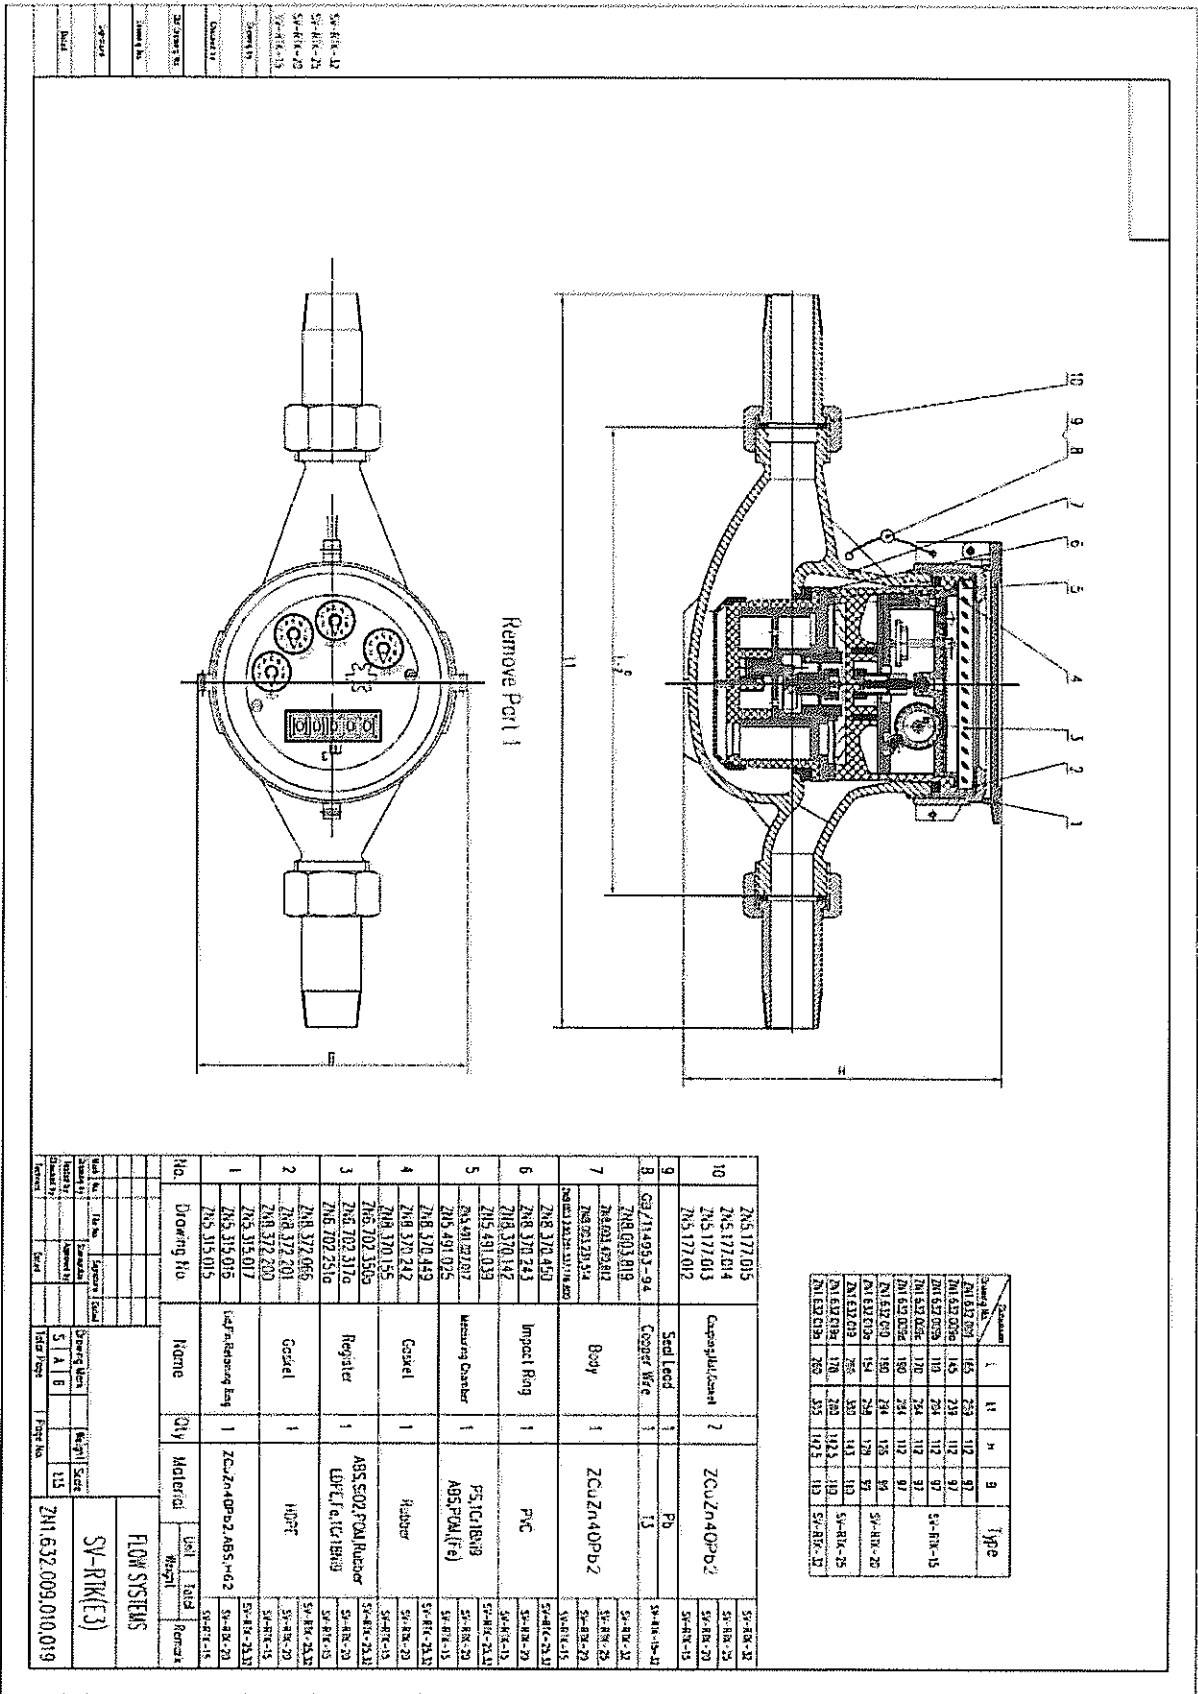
The water meter type SV-RTK (E4) assembly drawings:
